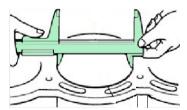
Measuring the diameter of cylinder head with vernier caliper
